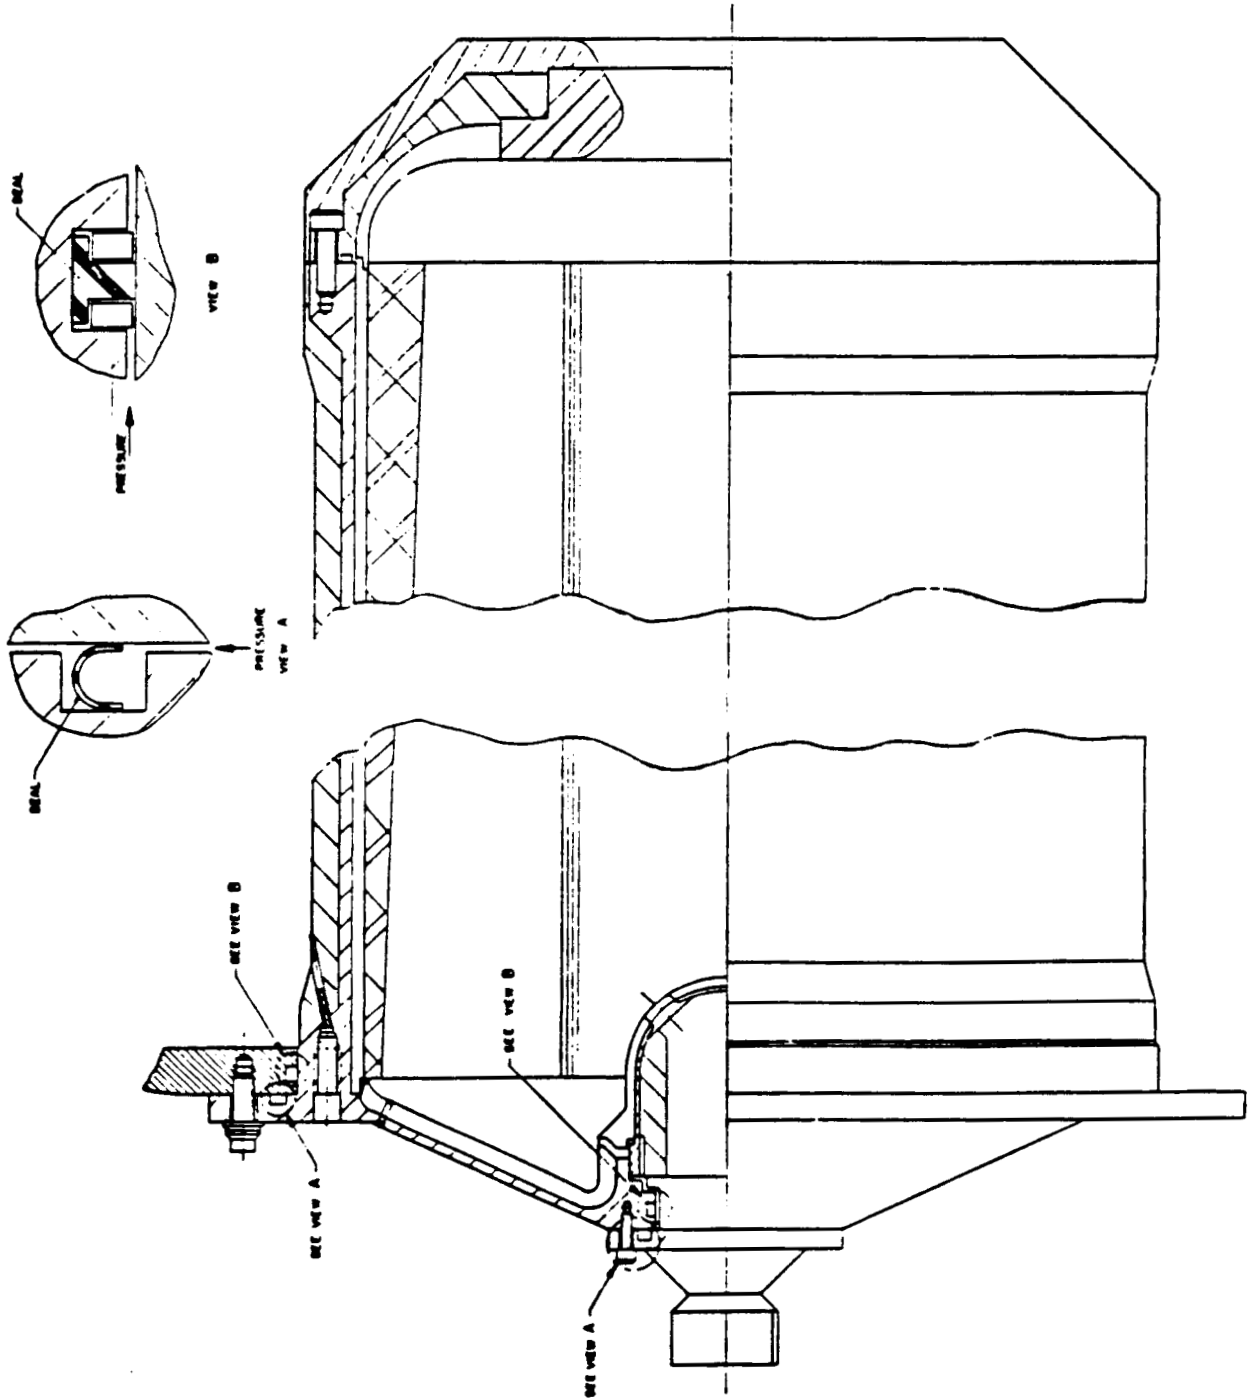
IMPROVED SRM IGNITER.
